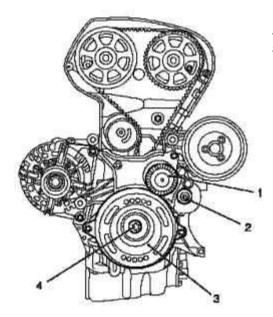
Removing Poly-V belt: 1 - Poly-V belt tensioner, 2 - attachment bolt 3 - snubber, 4 - bolt mount
